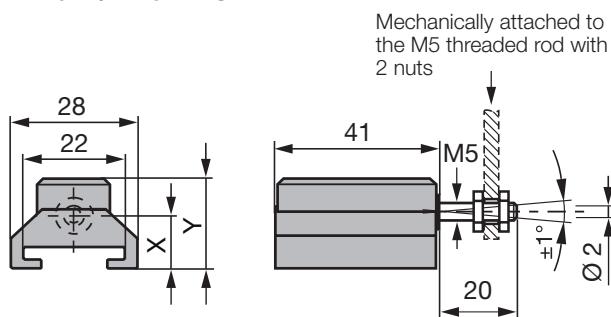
Installation dimensions of BTL5-M/N-2814-1S magnet
